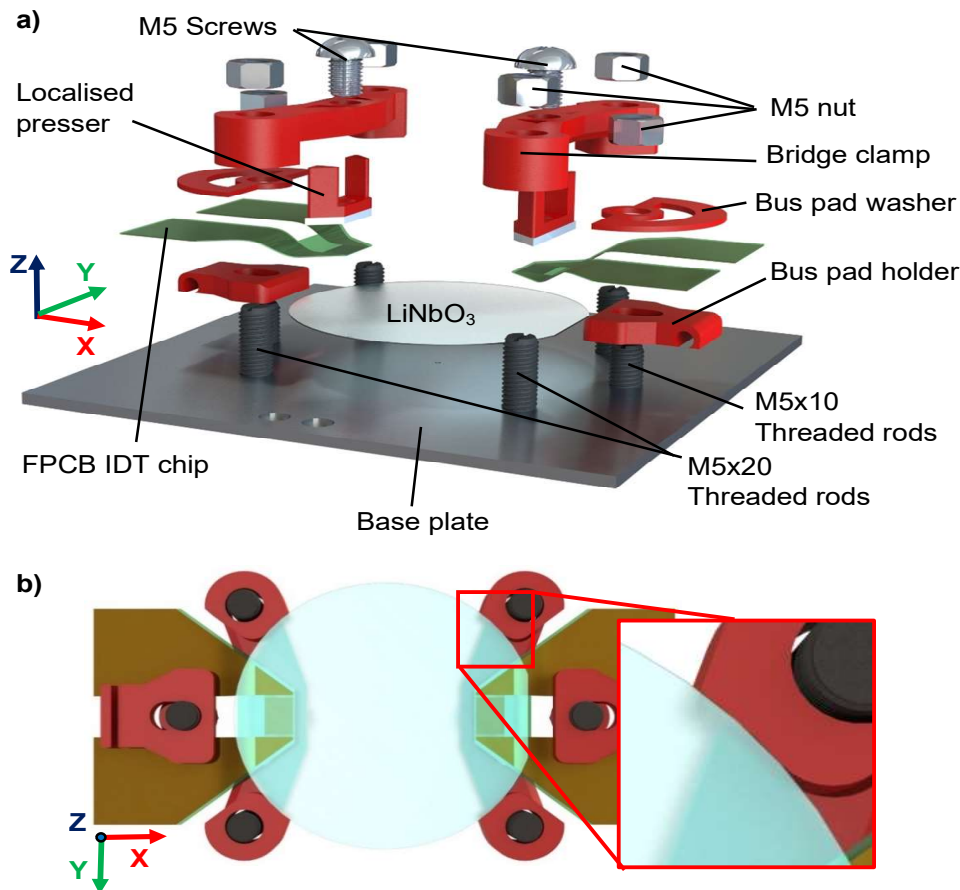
a) Exploded view of the hFPCB-SAW device. B) Bottom view of the hFPCB-SAW device demonstrating the matching surface of the bridge clamp's feet and 2-inch LiNbO₃, with an inset zoom showing the matching interference between the two components.
